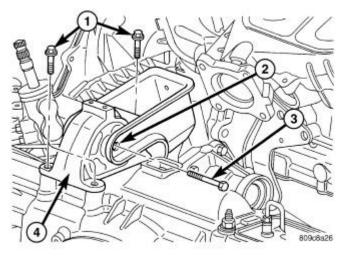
Removing/Installing Rear Engine Mount Courtesy of CHRYSLER LLC
